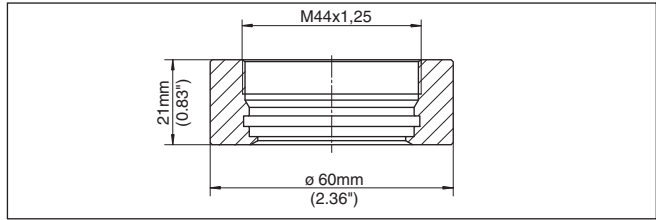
Dimensions of welded socket, M44 x 1.25 - VEGABAR 82, 83
